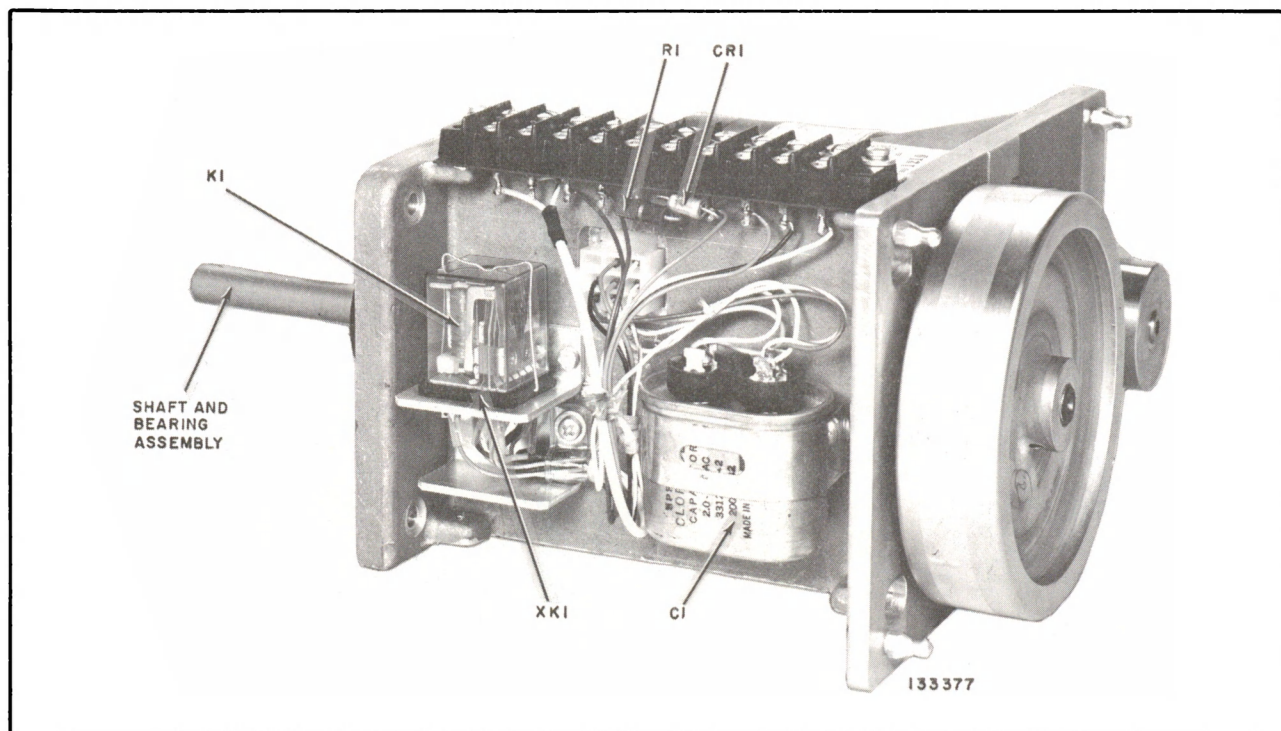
Two Speed Capstan Assembly showing Accessory Components
